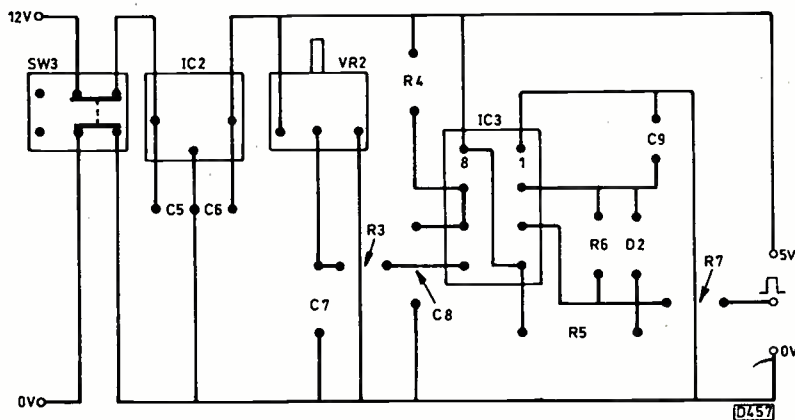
Suggested PCB layout, print side, for the mechanical polariser module – not to scale.
